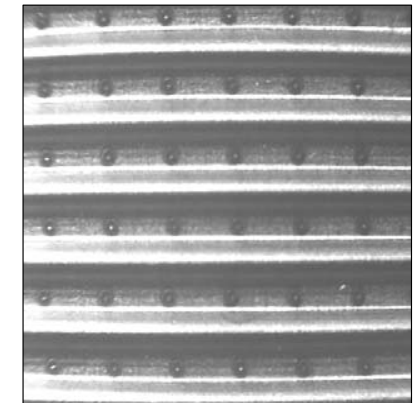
Laser spot welding of the 2 sheets
